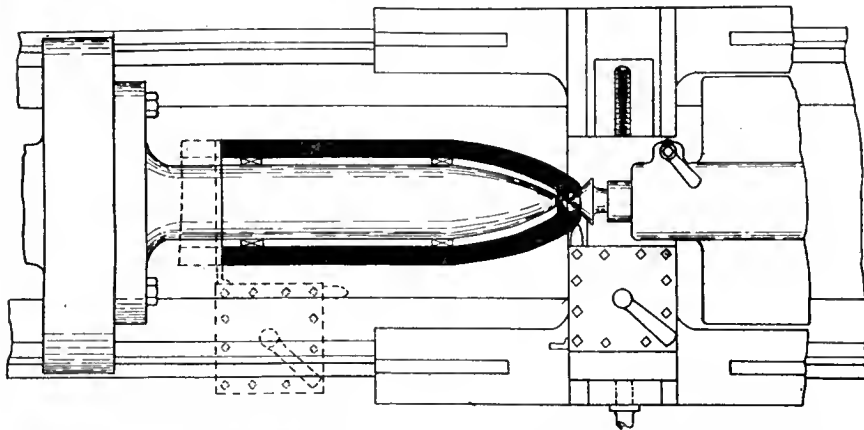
ROUGH TURNING AND CUTTING OFF ON REGULAR ENGINE LATHE.
